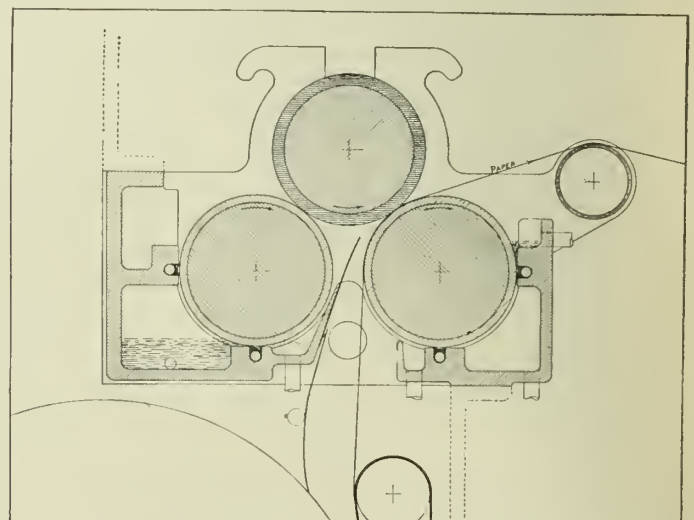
Diagrammatic Drawing of Outgoing Seal for Vacuum Dryer.
